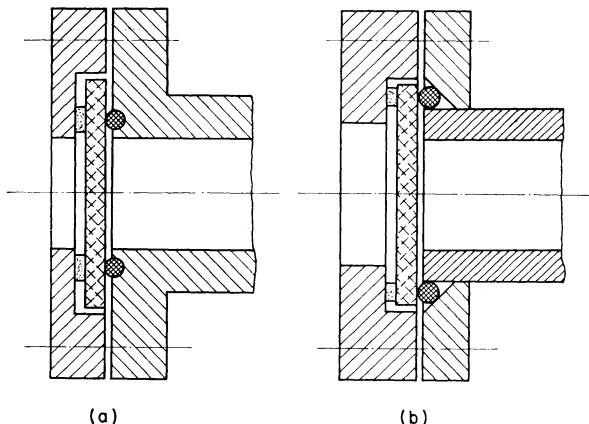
Windows sealed by O-rings: (a) O-ring in groove; (b) conical O-ring seal
